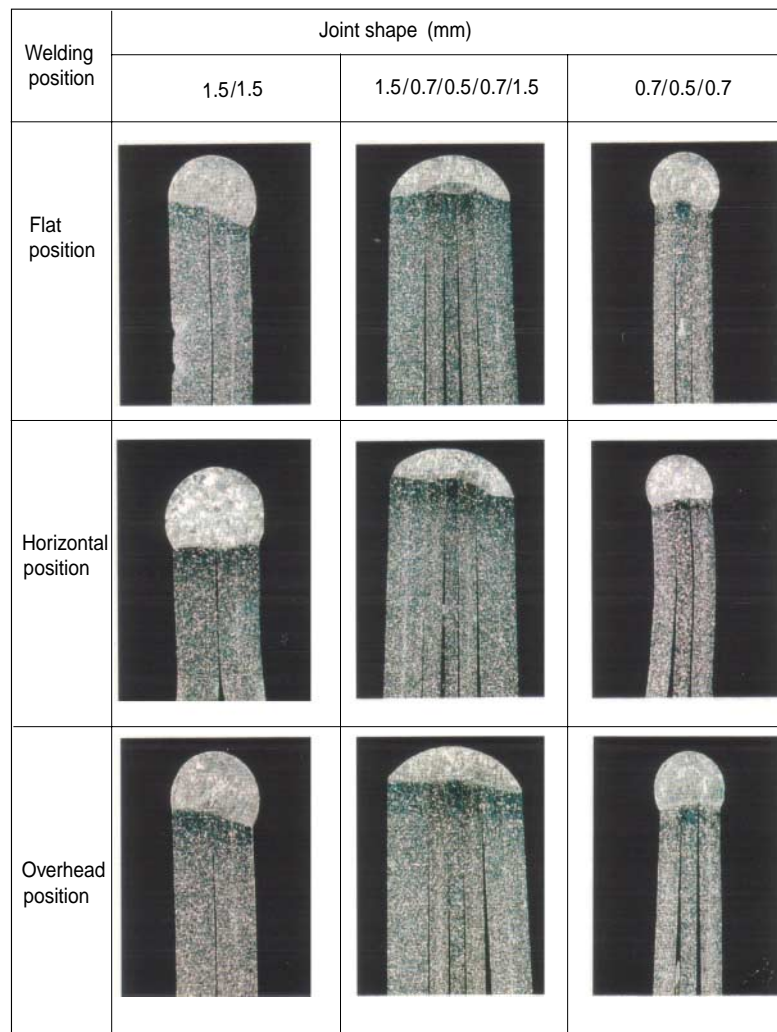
Cross-sectional macro structures of a bead produced by the newly developed robot
